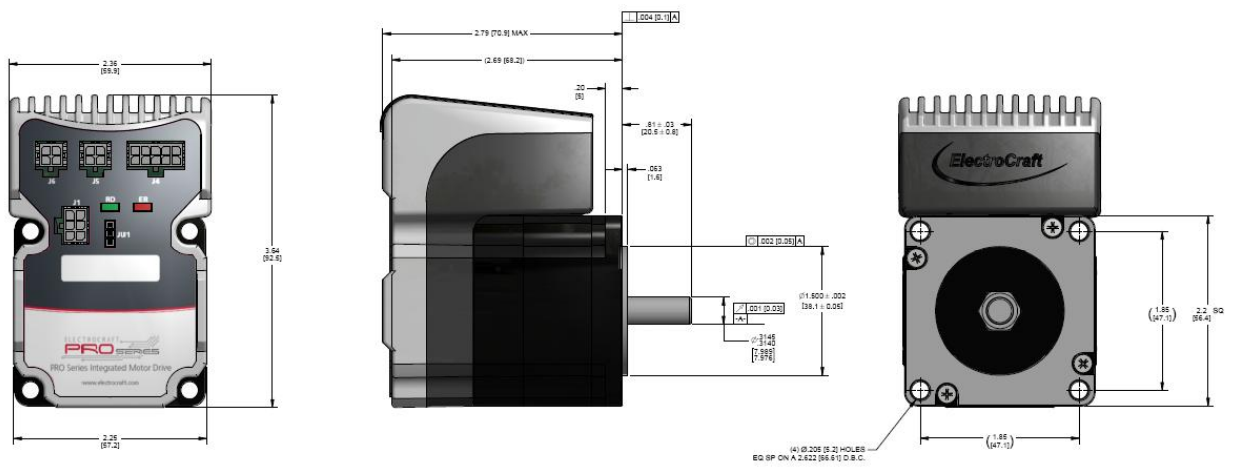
PT56-A64V48A-0-X-CAN mechanical dimensions.
